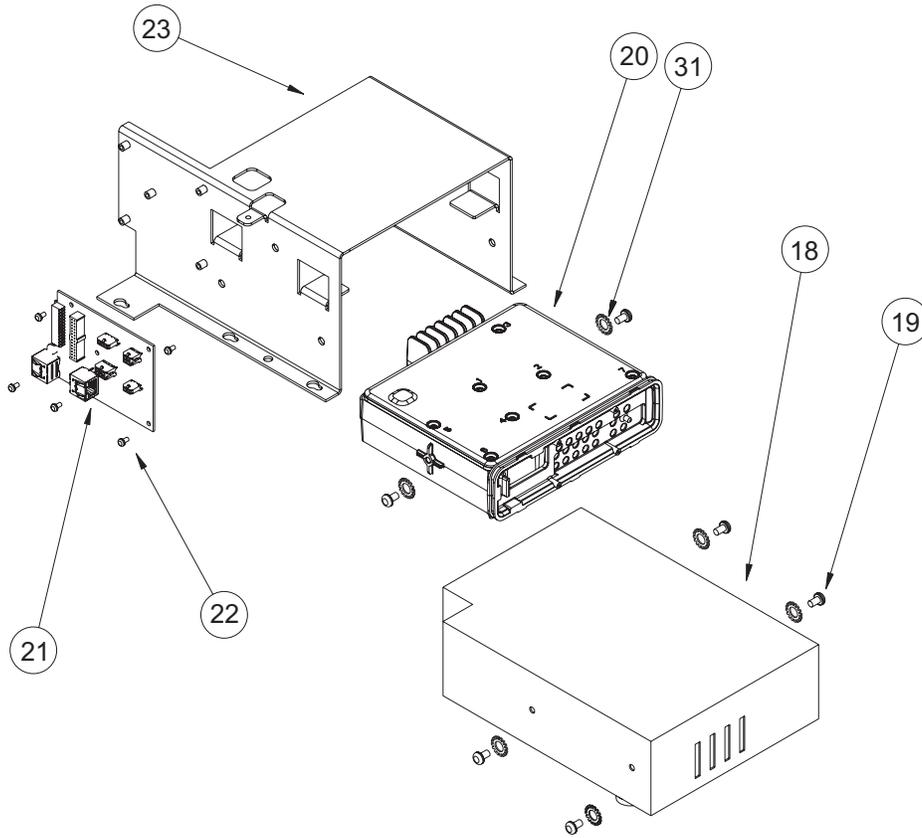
Receive Bracket and Radio Assembly Exploded View
